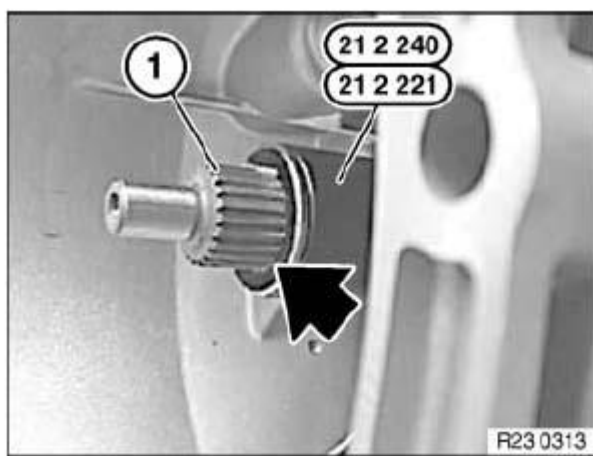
Identifying Special Tools (21 2 240) And (21 2 221)
